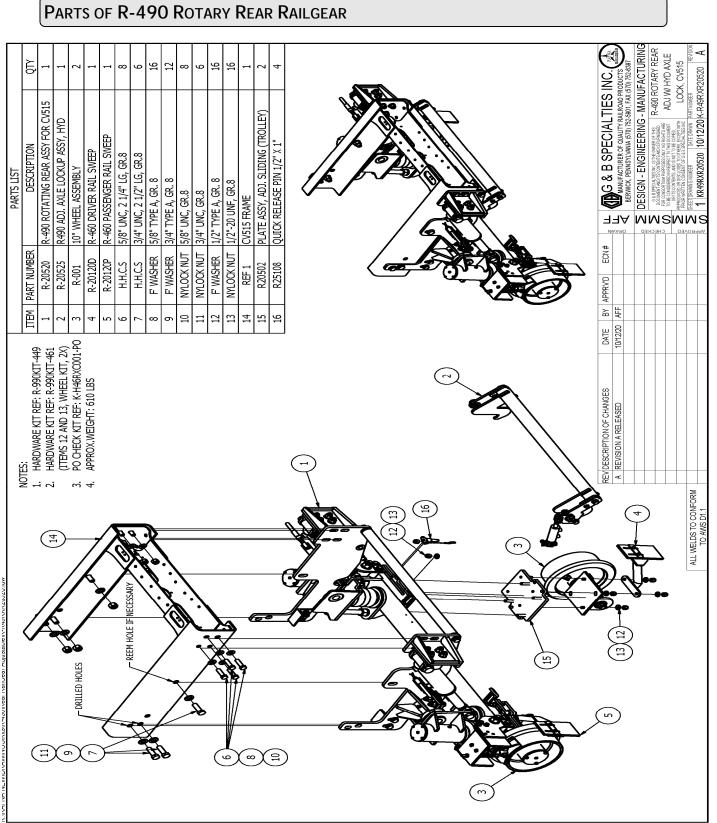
K-R49RXR20520 Sheet 1 (R-490 Rotary Rear with Hydraulic Lock)
